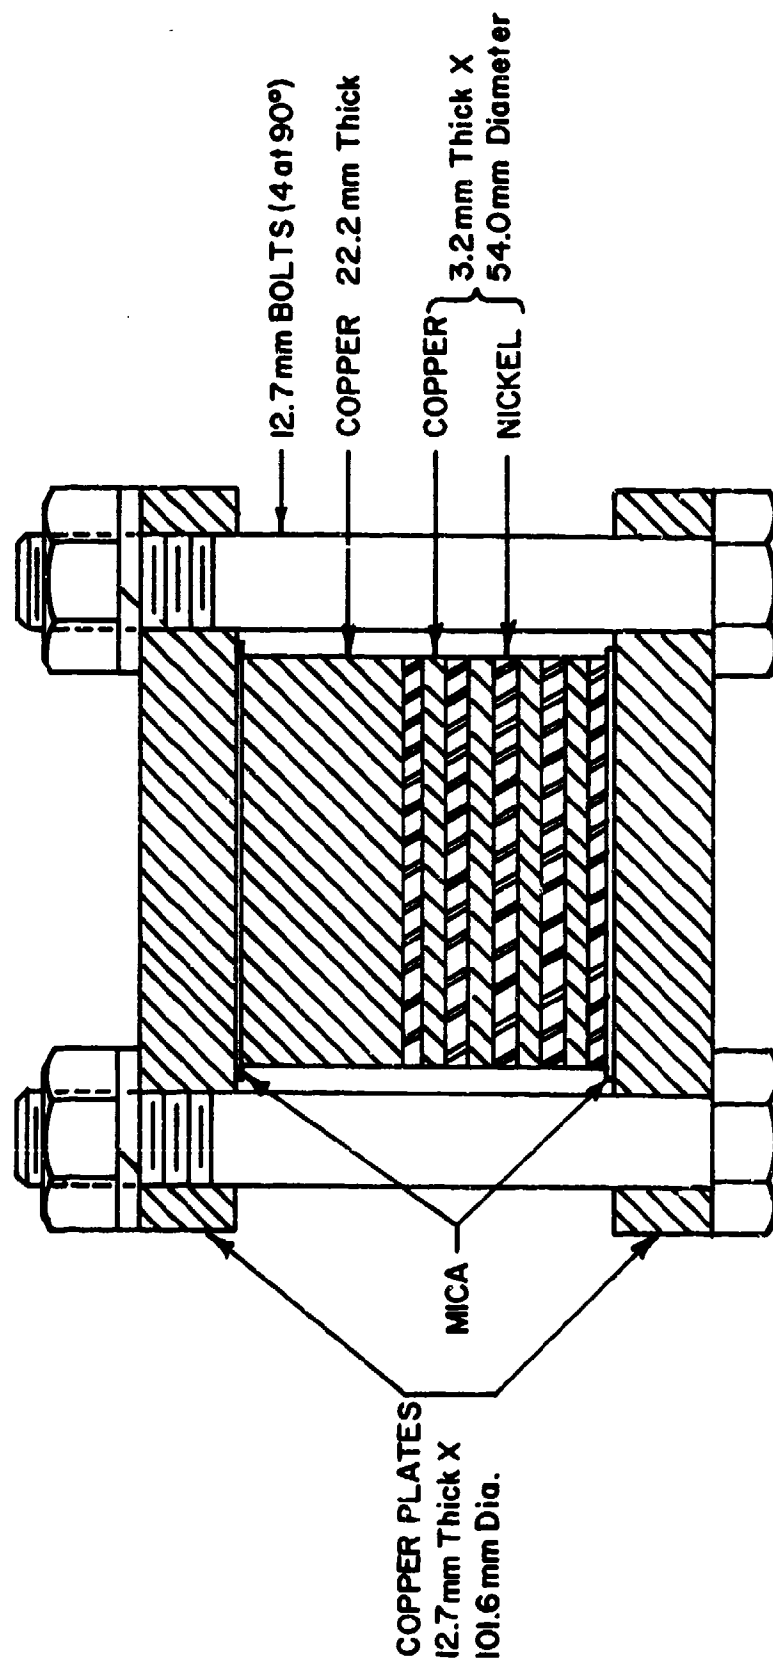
Setup for diffusion bonding of copper-nickel assemblies.
